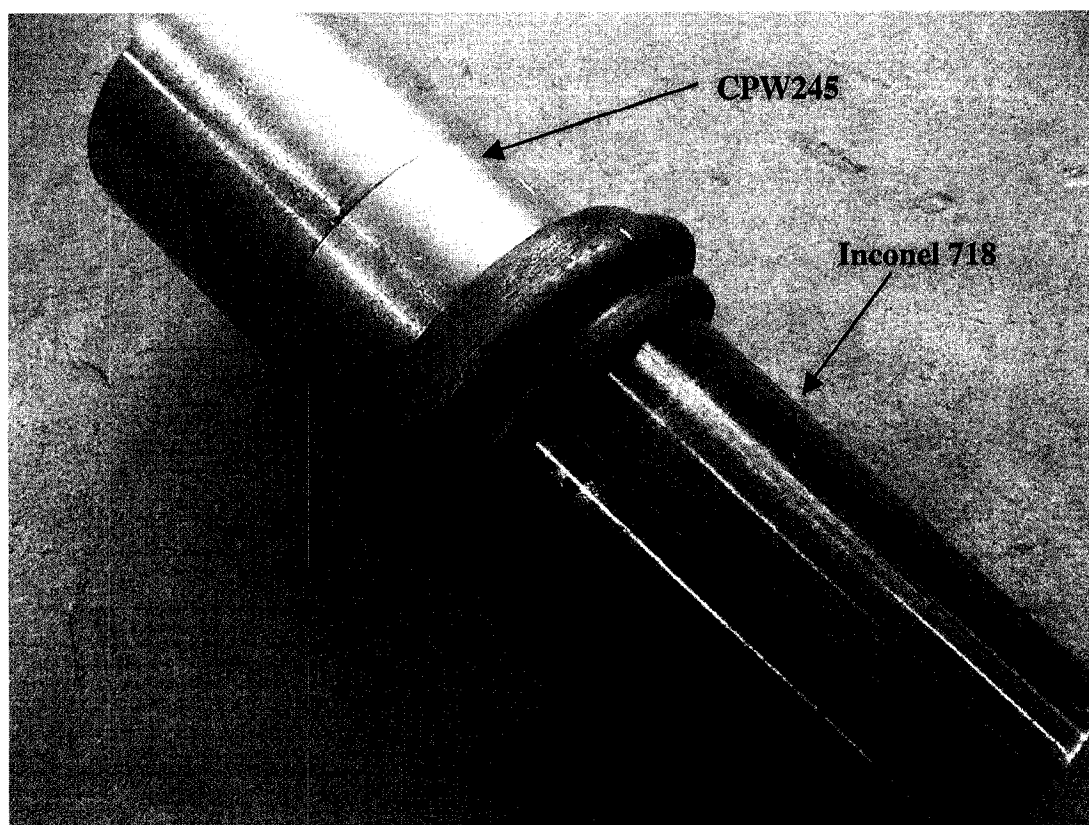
IW1 - First test pieces pair being friction welded
